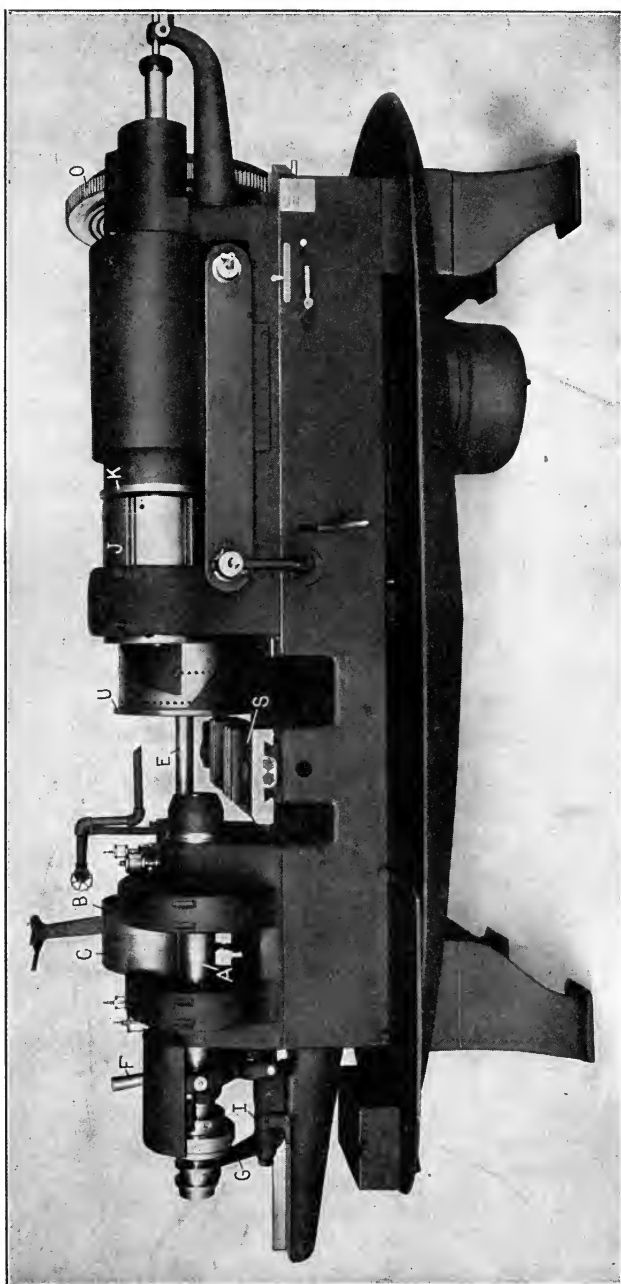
Front View of 3 $\frac{1}{4}$ -inch Cleveland Automatic Screw Machine
